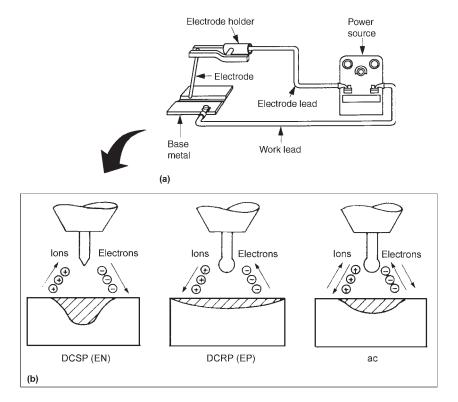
Setup and fundamentals of operation for shielded metal arc welding. Source: 2.3
